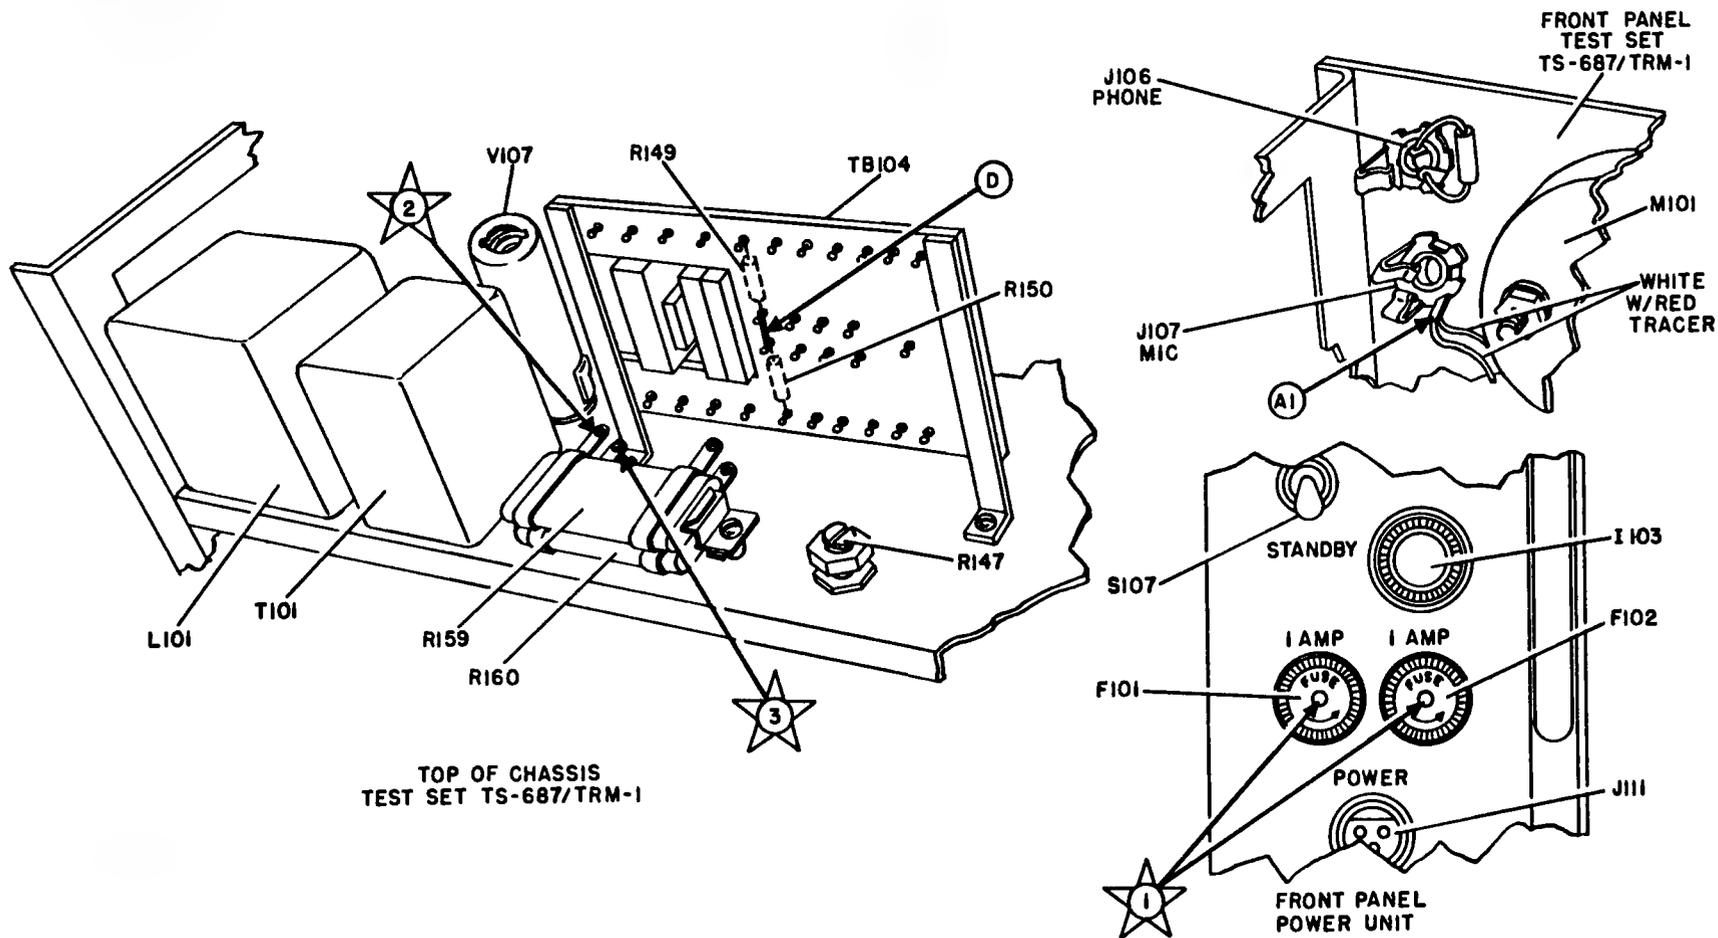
Location of Test Points, Top of Chassis and Front Panel, Test Set TS-687/TRM-1
